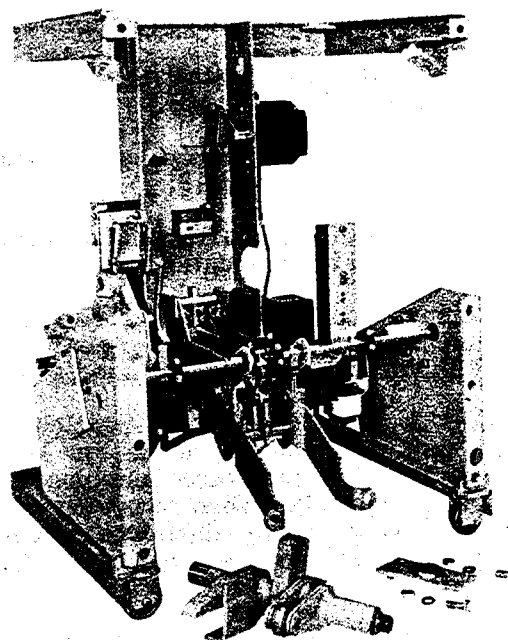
(8018984) Rear view of front frame-AK-50 showing cam shaft locking plate and cam shaft removed
